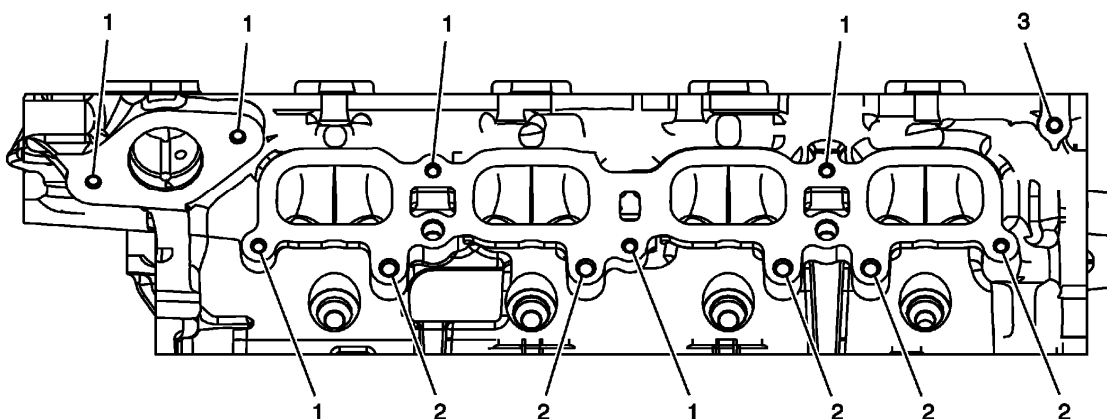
Cylinder Head Right Side View -- Intake Manifold Deck Face
